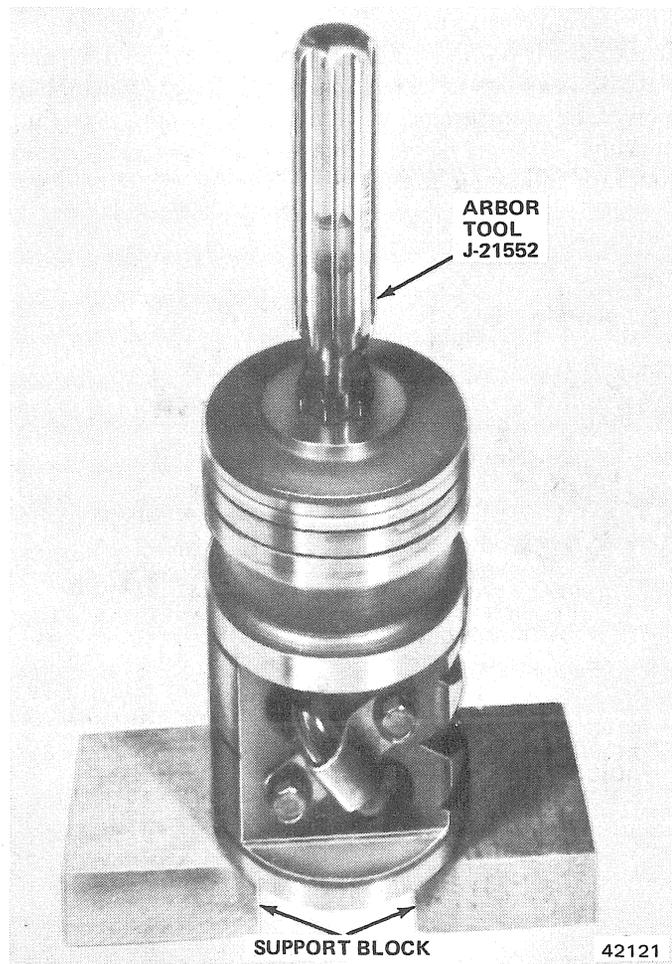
L-36 Arbor Tool Installed in Rack Piston
